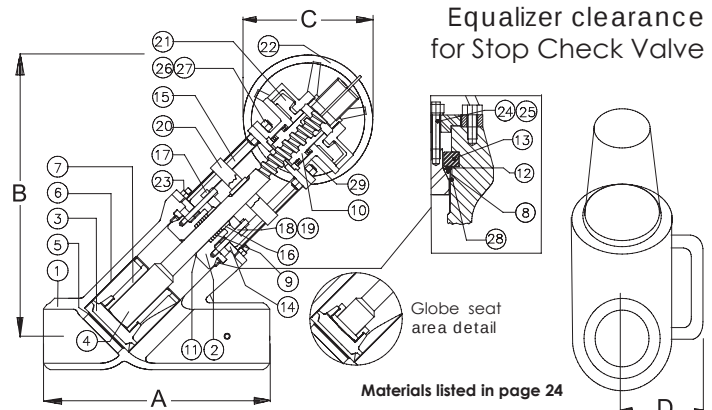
BY Globe, Butt Weld Ends
